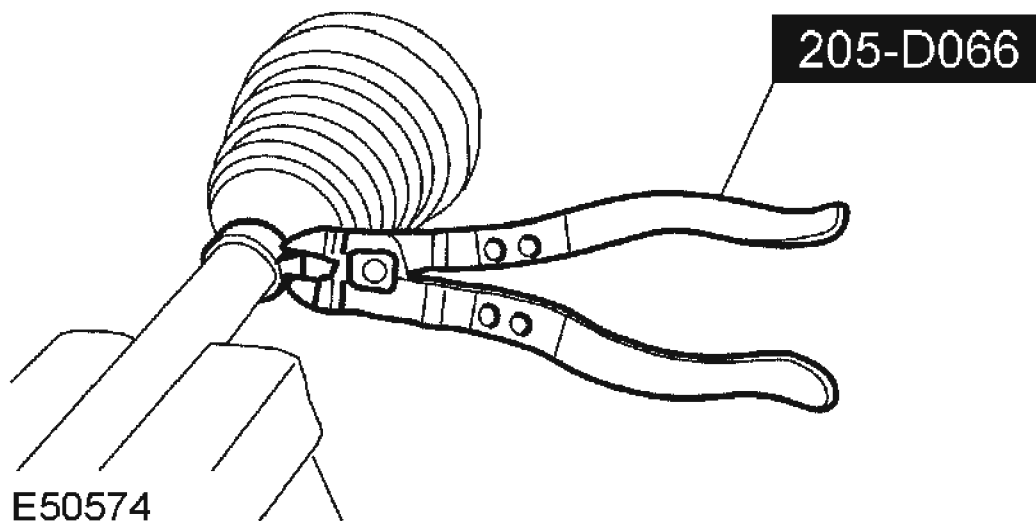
Installing Inner Boot Clamp Using Special Tool
